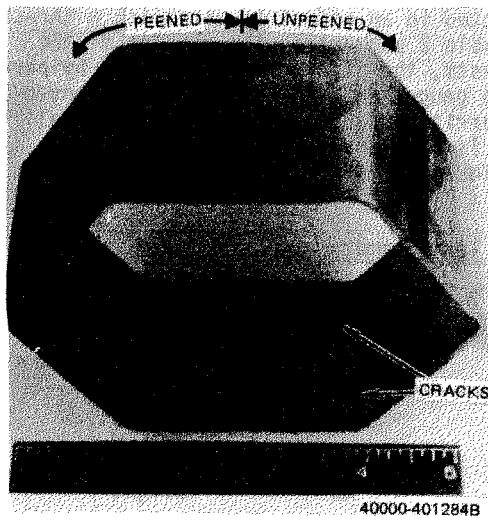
Stress corrosion cracks in unpeened surface of Type 316 stainless steel hexagonal tube (20% C.W.).
